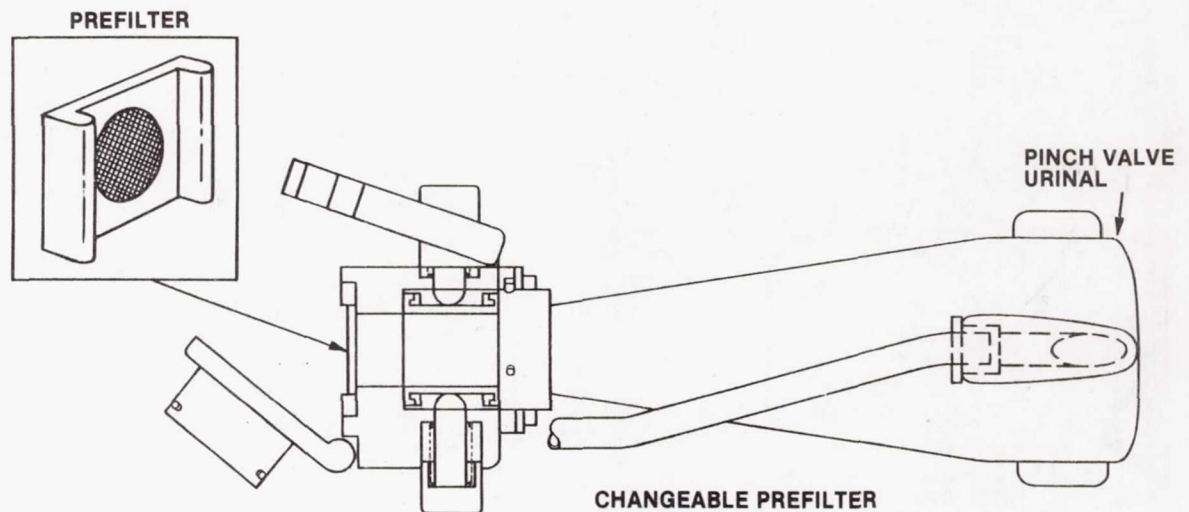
URINAL/PINCH VALVE ASSEMBLY
